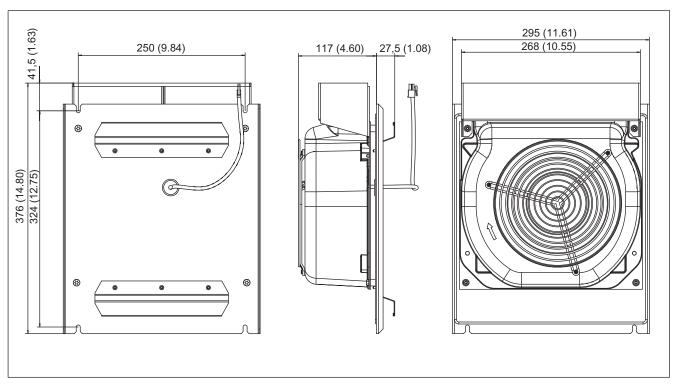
Dimension drawing of fan for 132 A and 200 A Motor Modules Booksize with external air cooling, all dimensions in mm and (inches)
